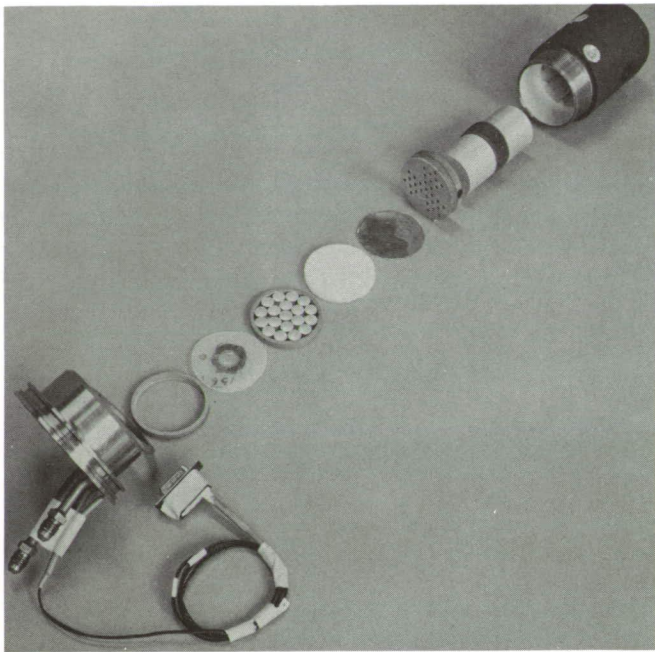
Modified Aerojet igniter (steel basket), exploded view
